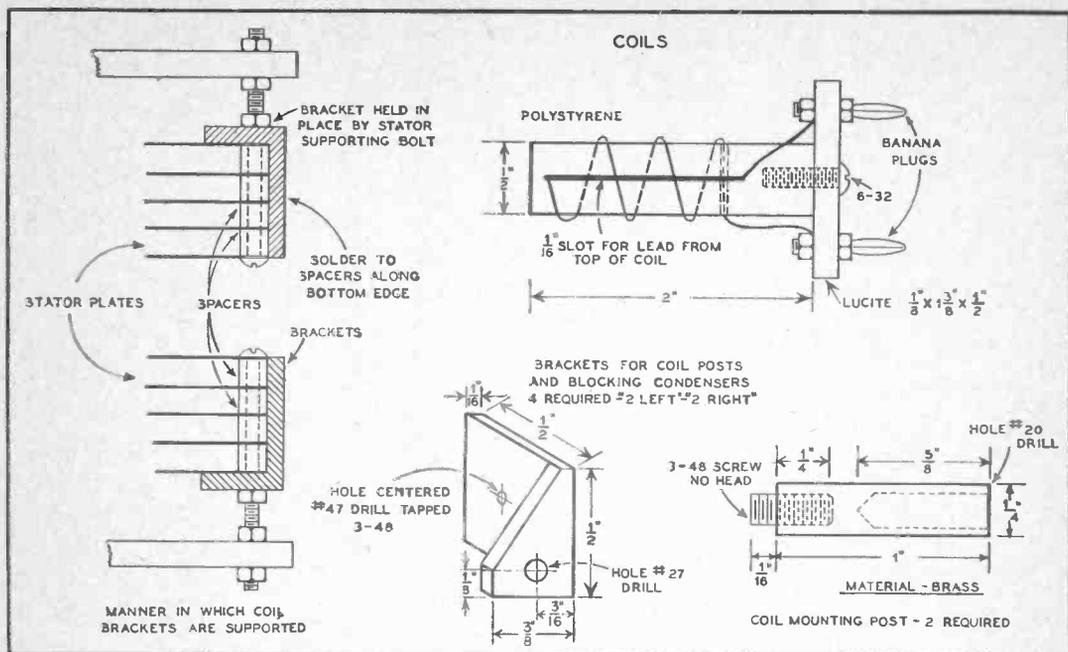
Construction details of the acorn tube oscillator coils and coil post brackets.
